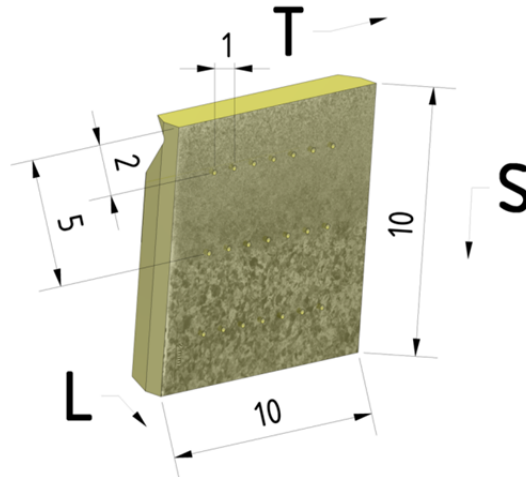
Example of hardness HV10 measurements beyond the fractured surface of a 0.4T-SE(B) specimen.
